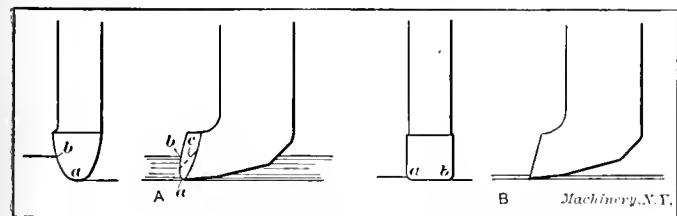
Planer Tools for Roughing and Finishing Cuts
